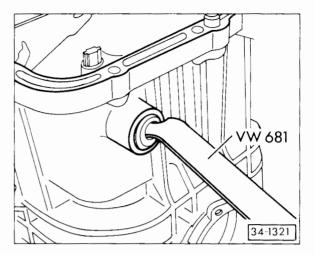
Pulling out oil seal for gearshift shaft Beforehand: Remove gearshift shaft.
